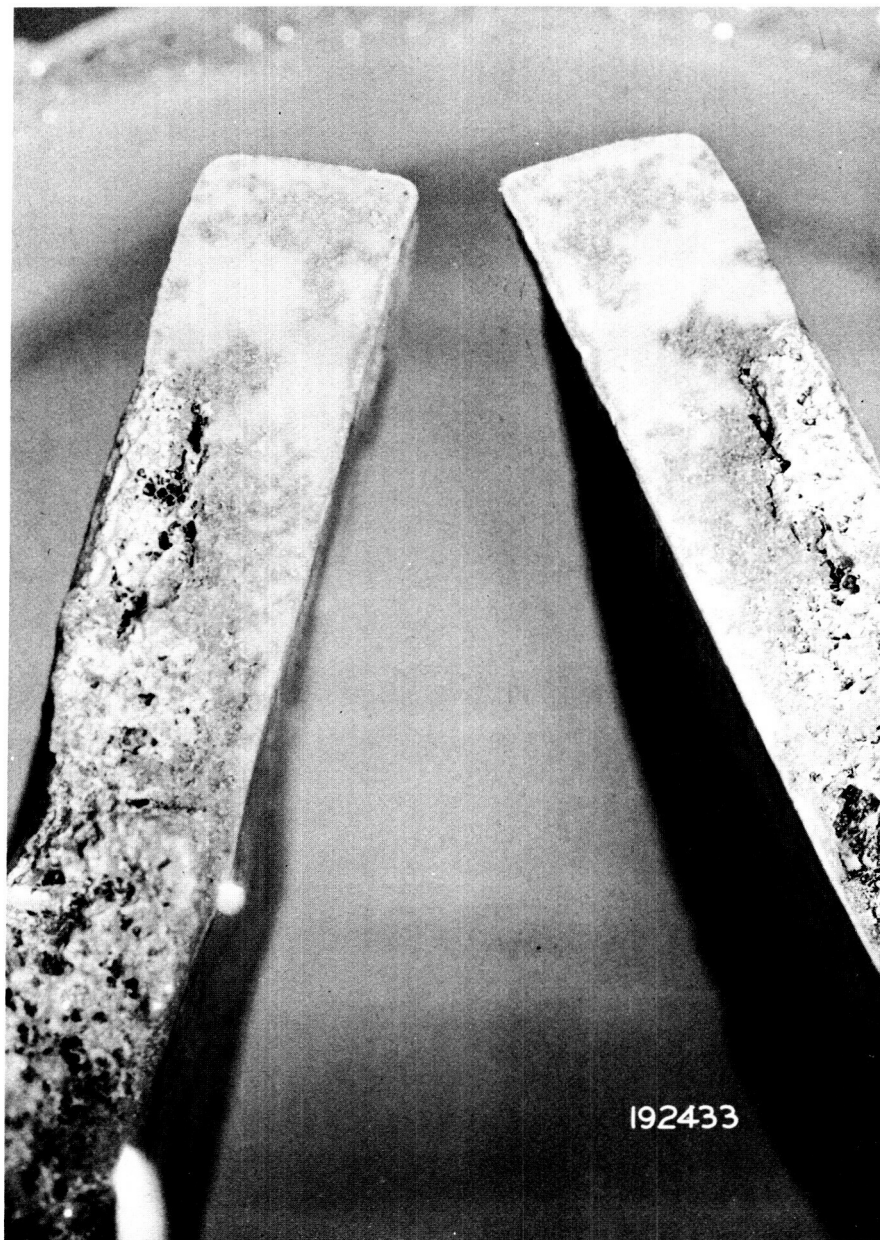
Broken Edges of Sixth Test Matrix — About 10% Bonded
